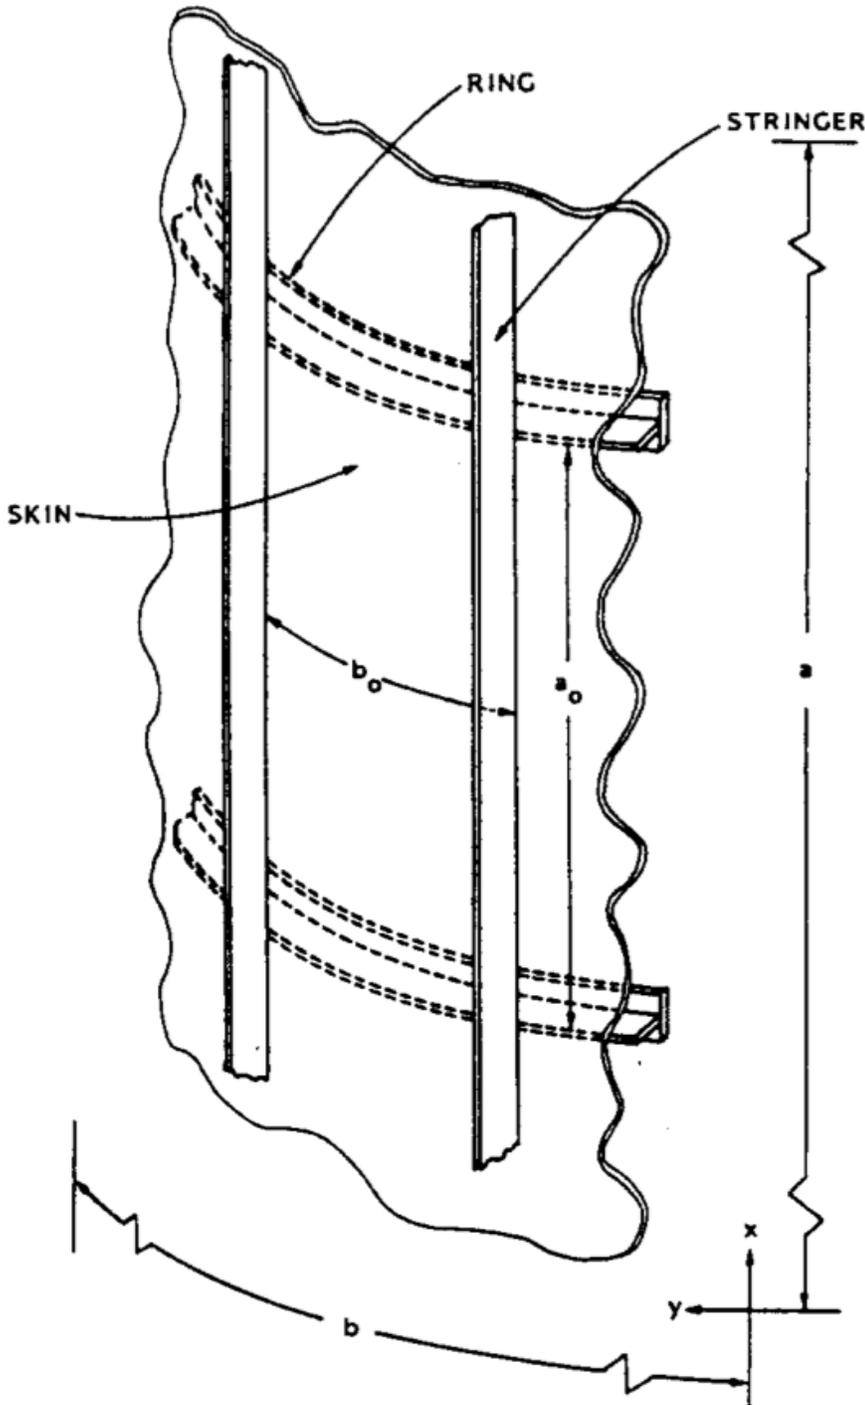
Stiffened cylindrical panel with overall dimensions (a, b) , ring spacing (a_0) and stringer spacing (b_0) (from Computers & Structures, Vol. 27, No. 4, pp. 541-563, 1987)
